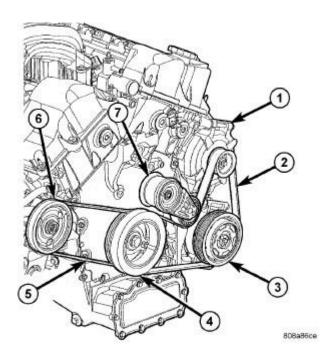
Accessory Drive Belt System - 2.7L Courtesy of CHRYSLER LLC
